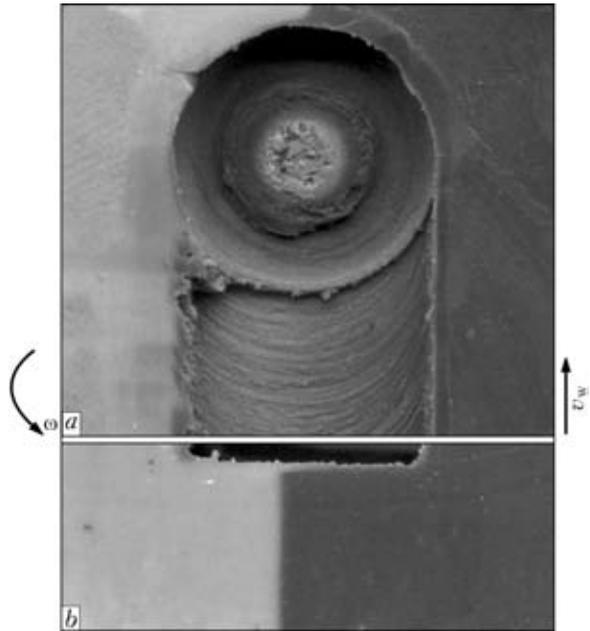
Appearance of face surface (a) and transverse section (b) of the joint obtained by FSW using a tool without a tip
